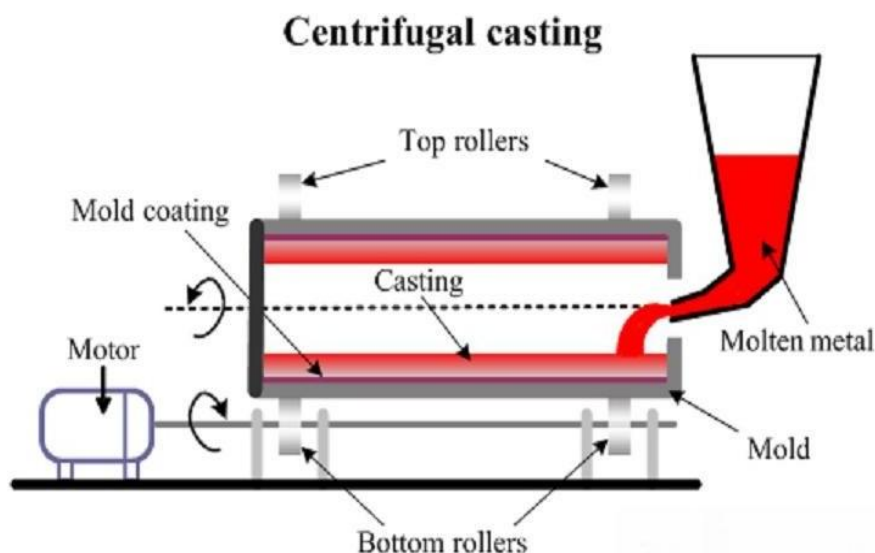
Schematic representation of Centrifugal casting-[26]
